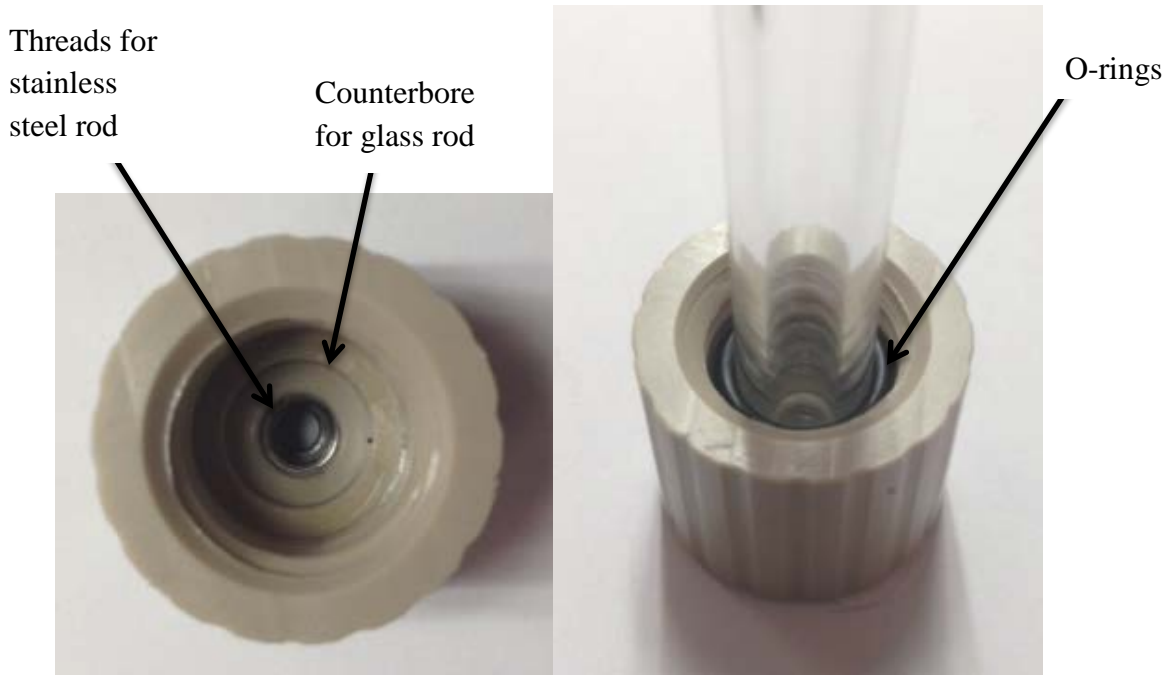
A) PEEK piece with counterbore and threads B) Glass rod placed into counterbore
